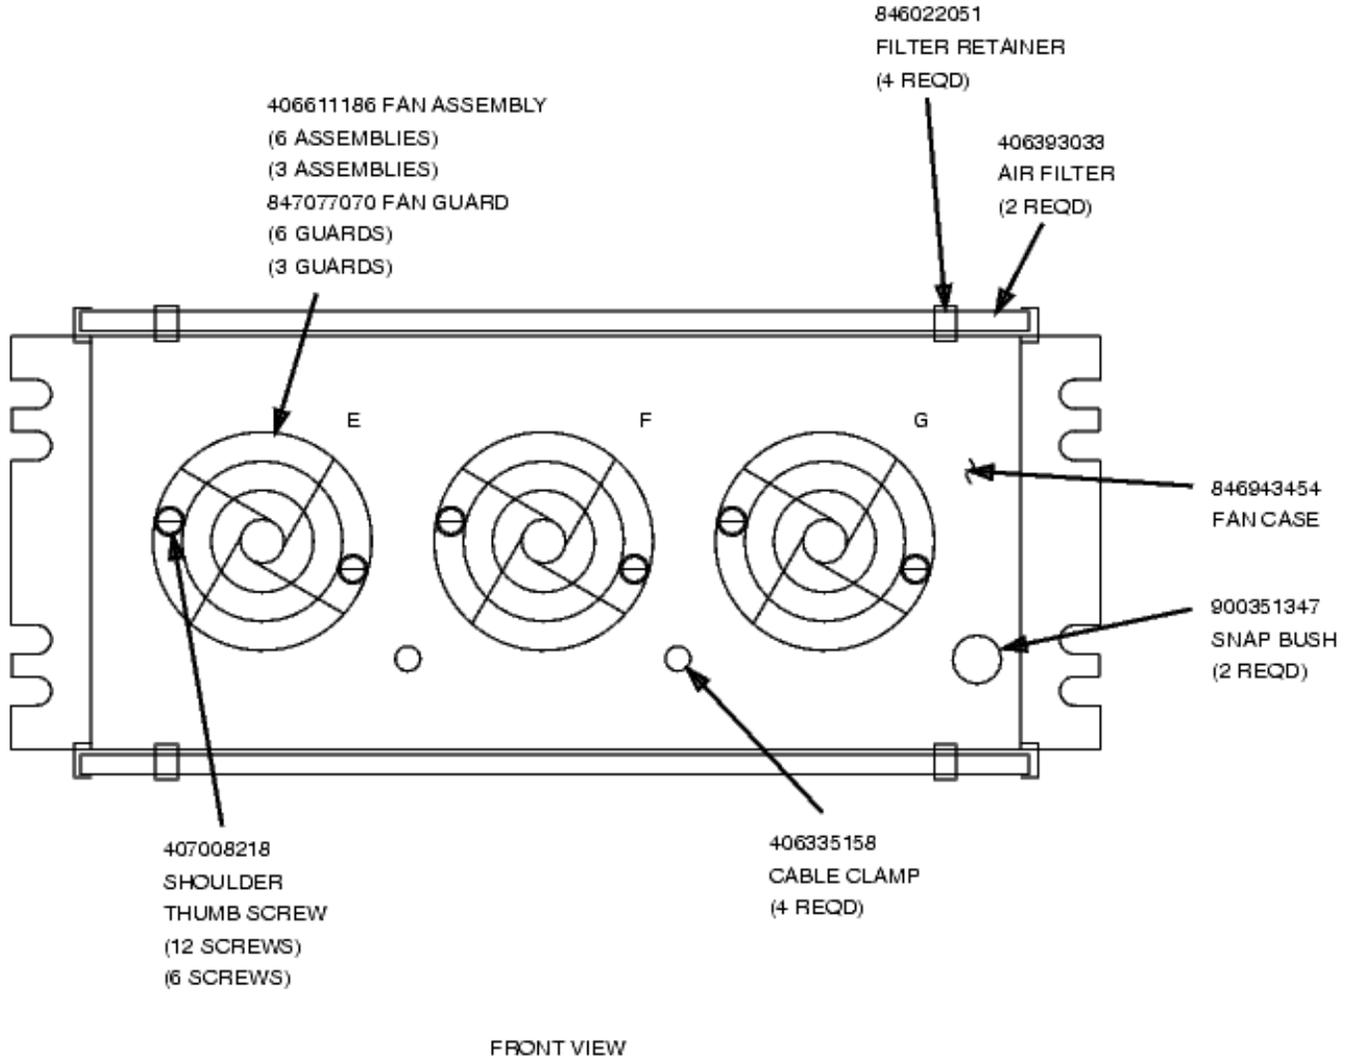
Fan Assembly (3-6 Fans) Front View - J5D003FH-2
